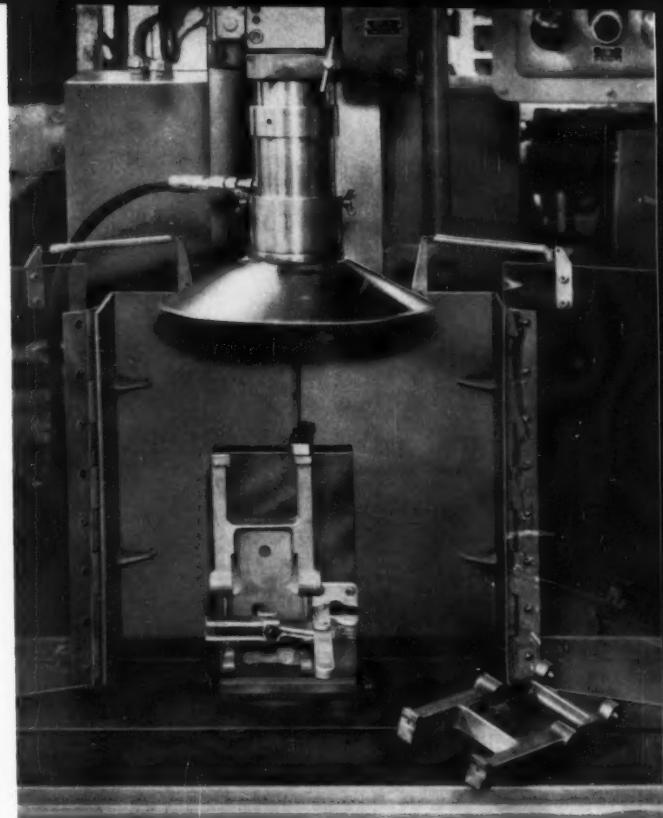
This magnesium part for a missile is set up for deep-hole drilling of a 1/8-inch hole to a depth of 6 inches. A smooth finish is obtained.
